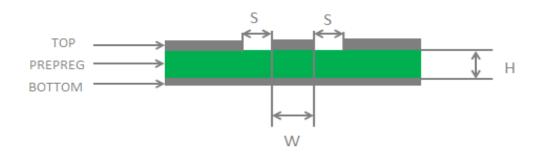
Coplanar Waveguide Line Design on a 2-layer PCB
